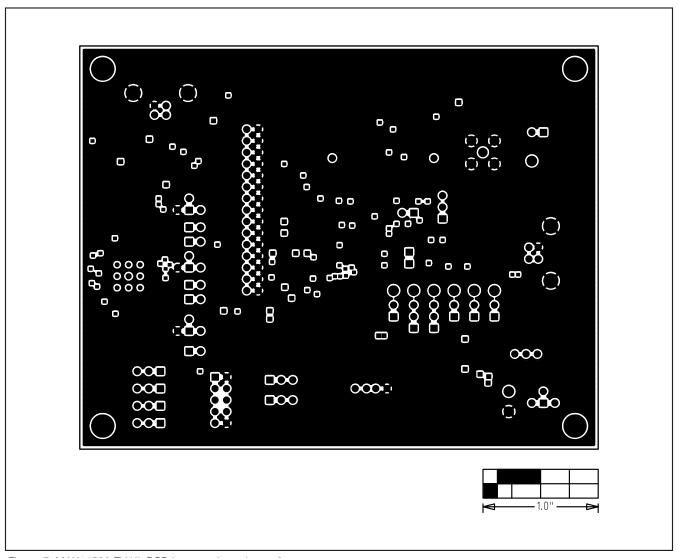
MAX14502 EV Kit PCB Layout—Inner Layer 2
